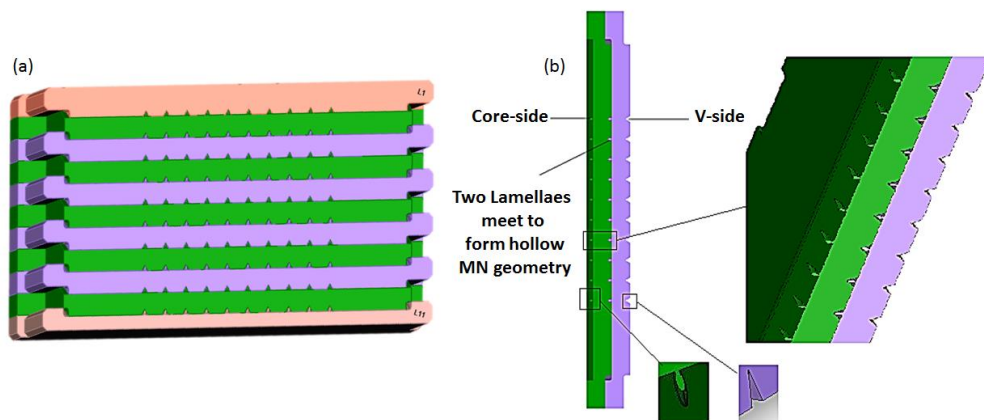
(a) Showing the stacked laminate assembly (b) depicts a side view of the laminate showing v-side and core side.
